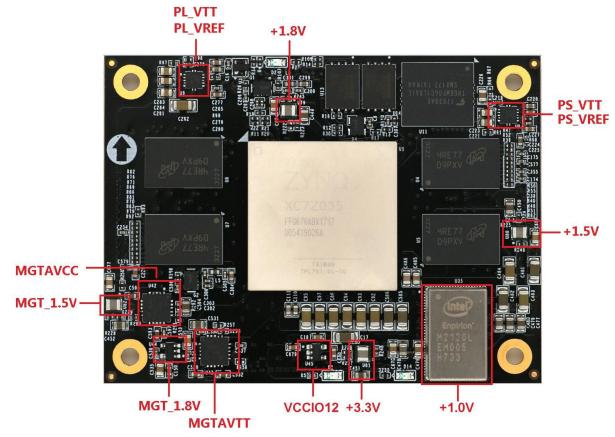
Power Supply on the AX7Z035 Core Board
